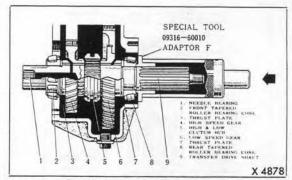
Installing the cone of rear tapered roller bearing on the transfer drive shaft with special tool.
